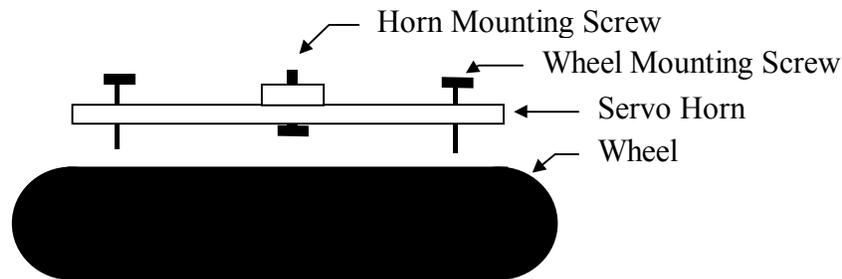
How to mount a servo horn onto a wheel. Be sure the horn mounting screw is placed into the horn before fastening the horn to the wheel with the other two screws.
